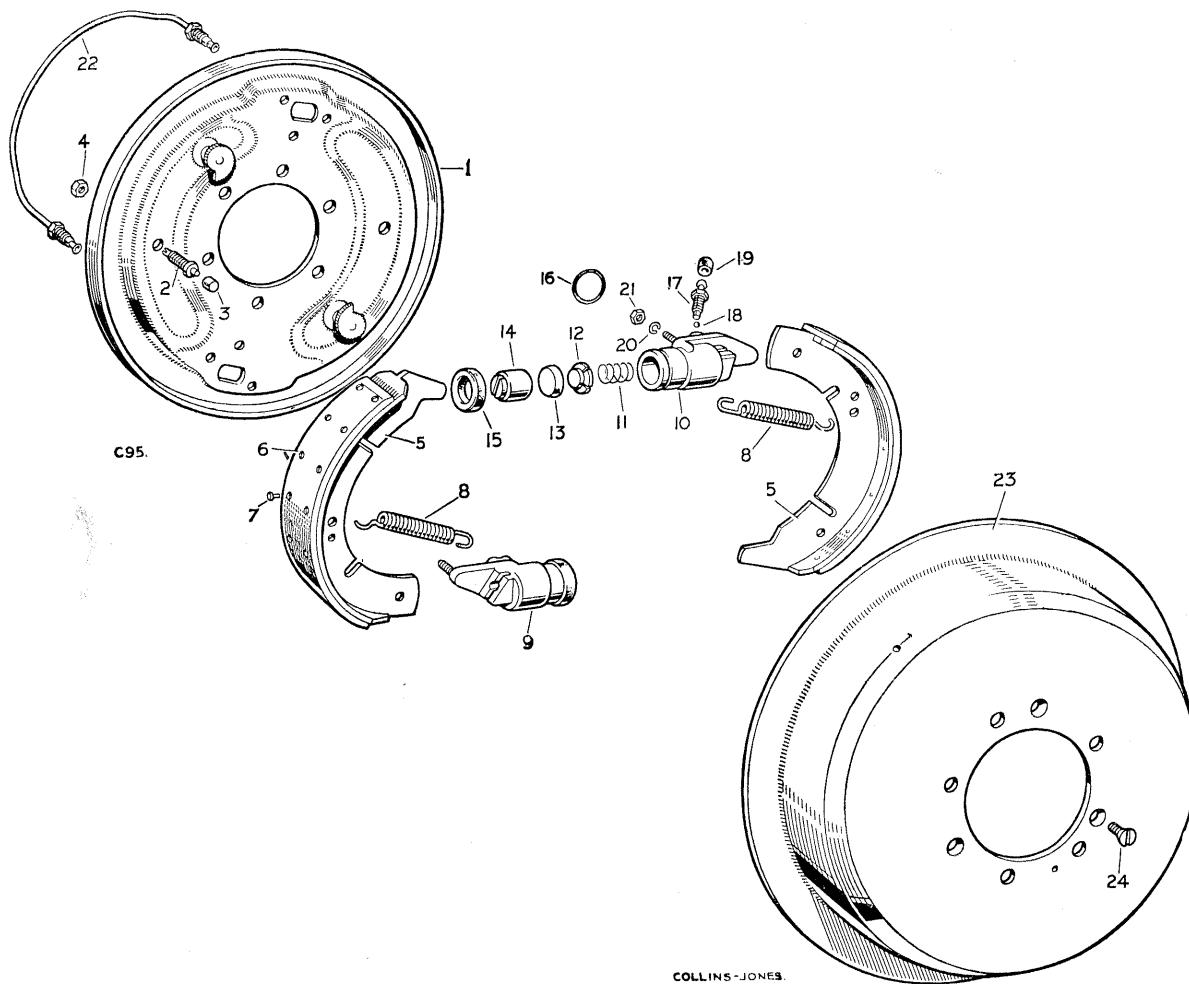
Layout of front wheel brake unit, 11" brakes—109 models
